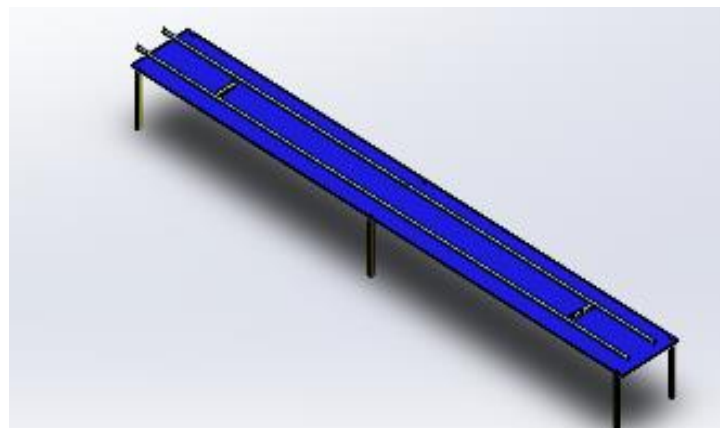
Assembly of frame support, roller support, spray tube with bolt and nut
